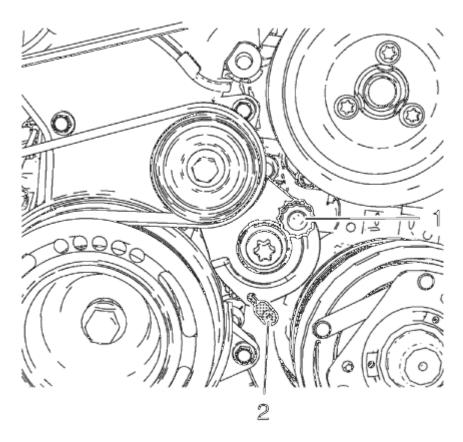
Drive Belt Tensioner And Special Tool Courtesy of GENERAL MOTORS COMPANY
